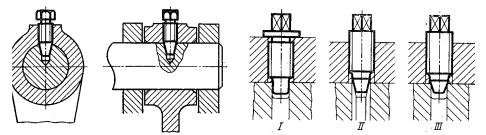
Axial and angular locking of lever on shaft with tapered-point set screw
